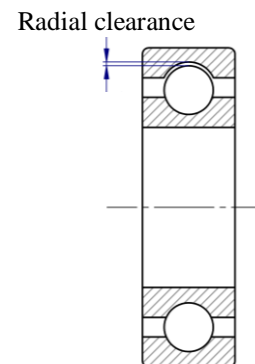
Radial clearance in a single row deep groove ball bearing.
